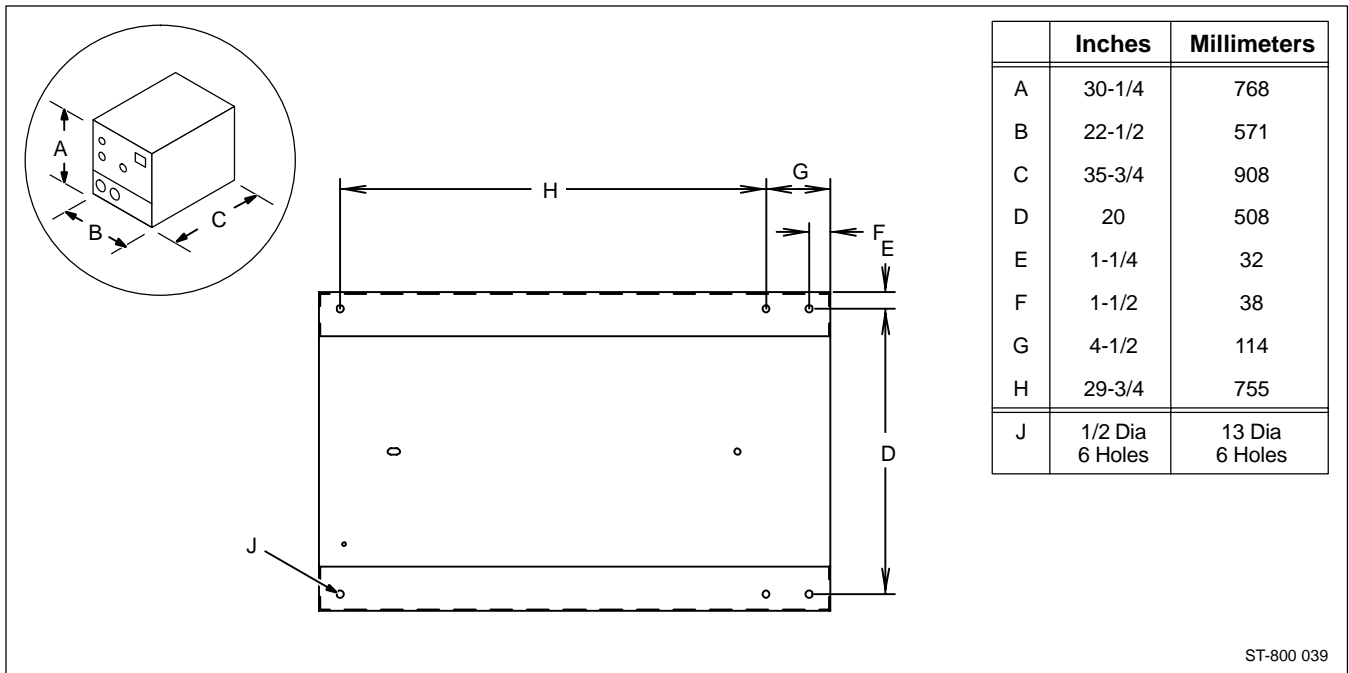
Overall Dimensions And Base Mounting Hole Layout
